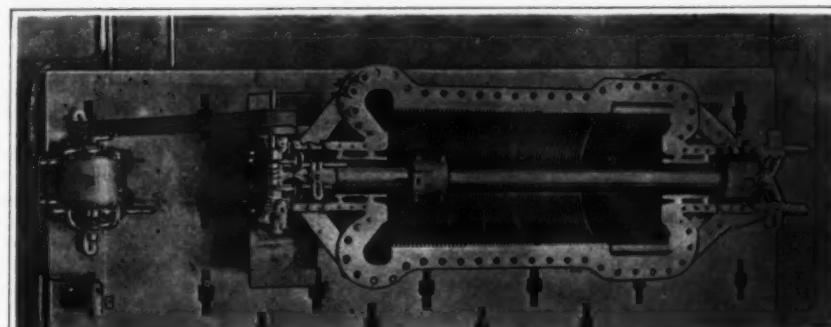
Arrangement of the boring-bar for machining the ends of the blades in the cases.
